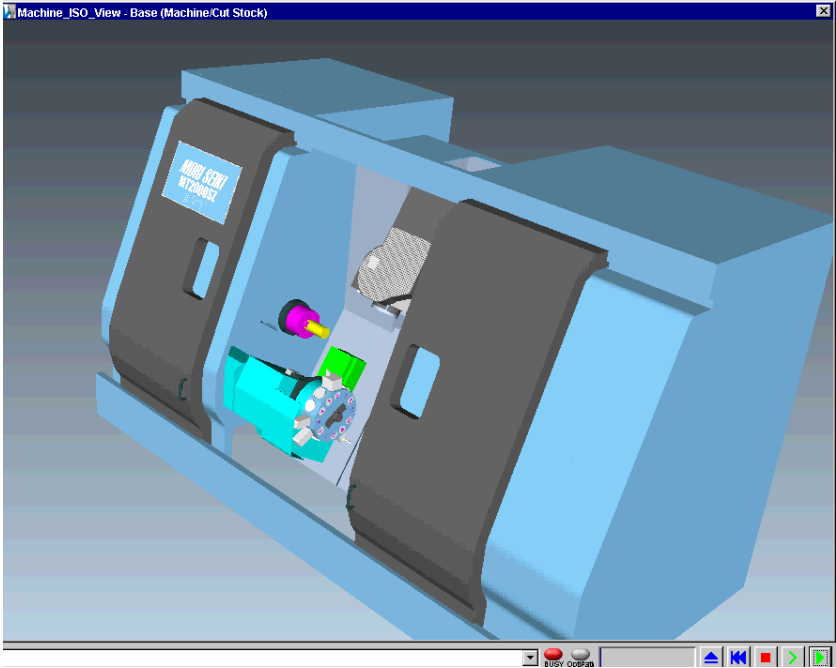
3D simulation of machining on CNC machine in system Vericut
